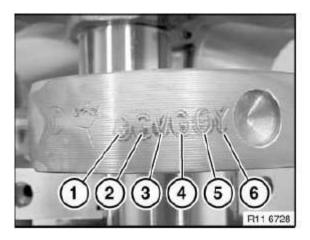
Identifying Color Allocation On Crankshaft (Bedplate Bearing Block) Courtesy of BMW OF NORTH AMERICA, INC.
